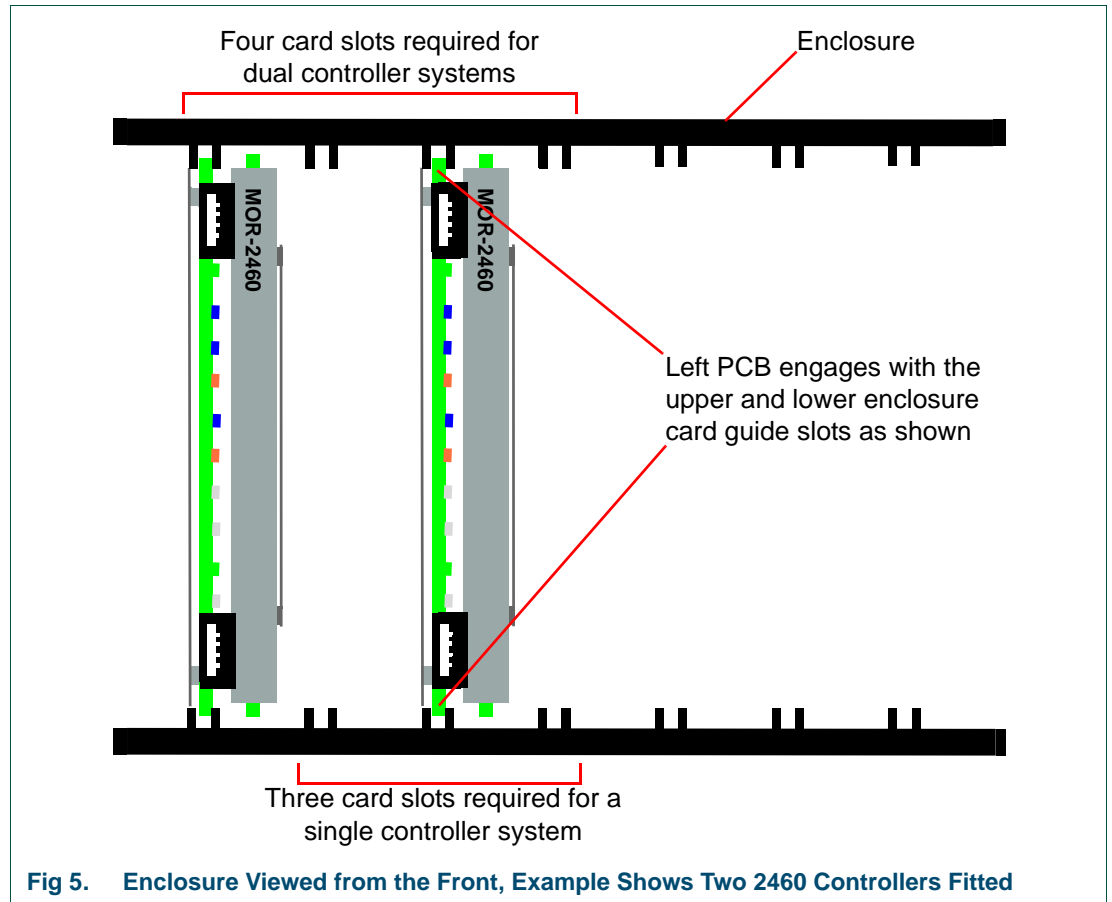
Enclosure Viewed from the Front, Example Shows Two 2460 Controllers Fitted
